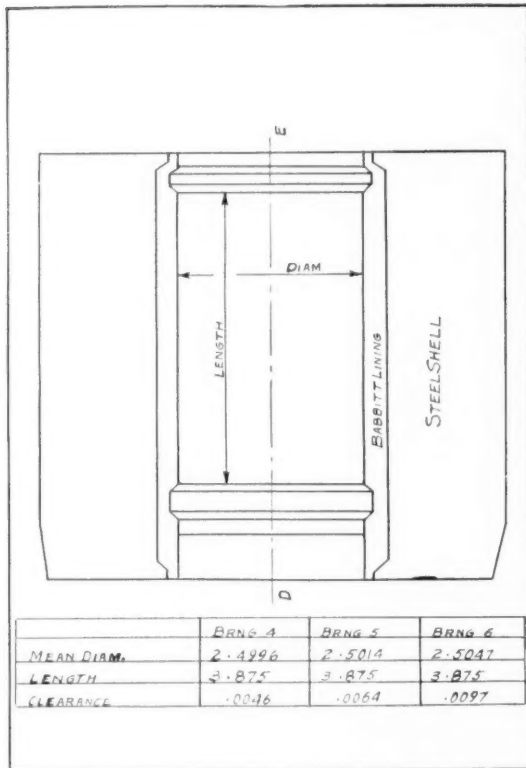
Longitudinal section of the bearing, showing the large oil grooves on each end.
